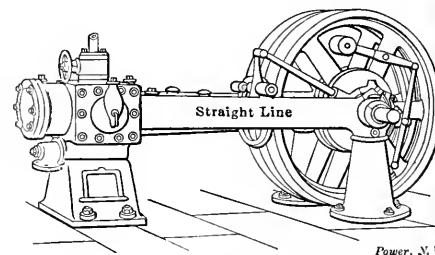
ENGINE WITH ROCKER ARM FOR CONSTANT LEAD
